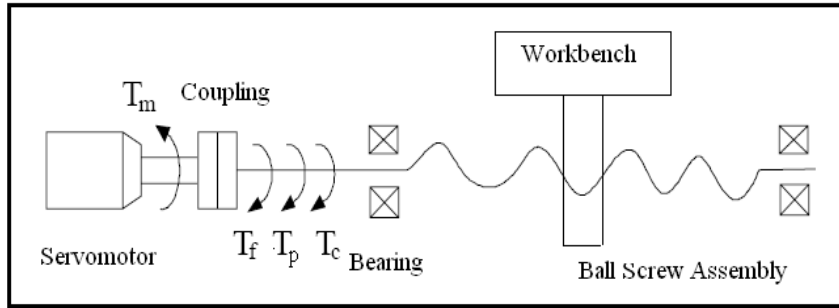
The block diagram of a servomechanism of the CNC machine tools
